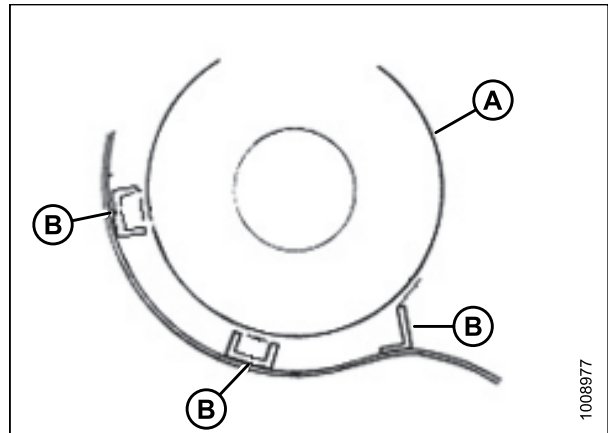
End View Diagram Showing Auger and Stripper Bars
